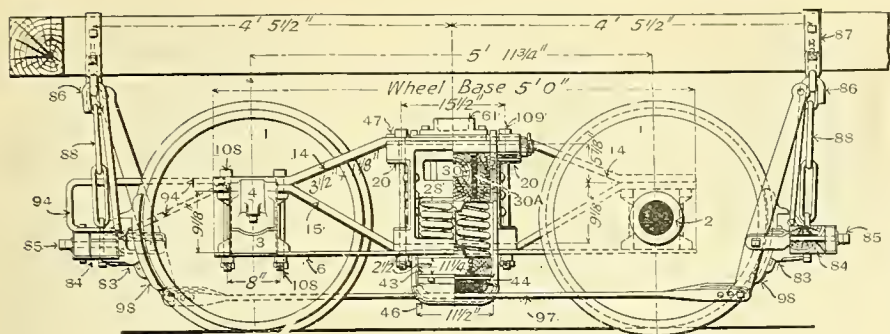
Half Side Elevation and Half Longitudinal Section.
